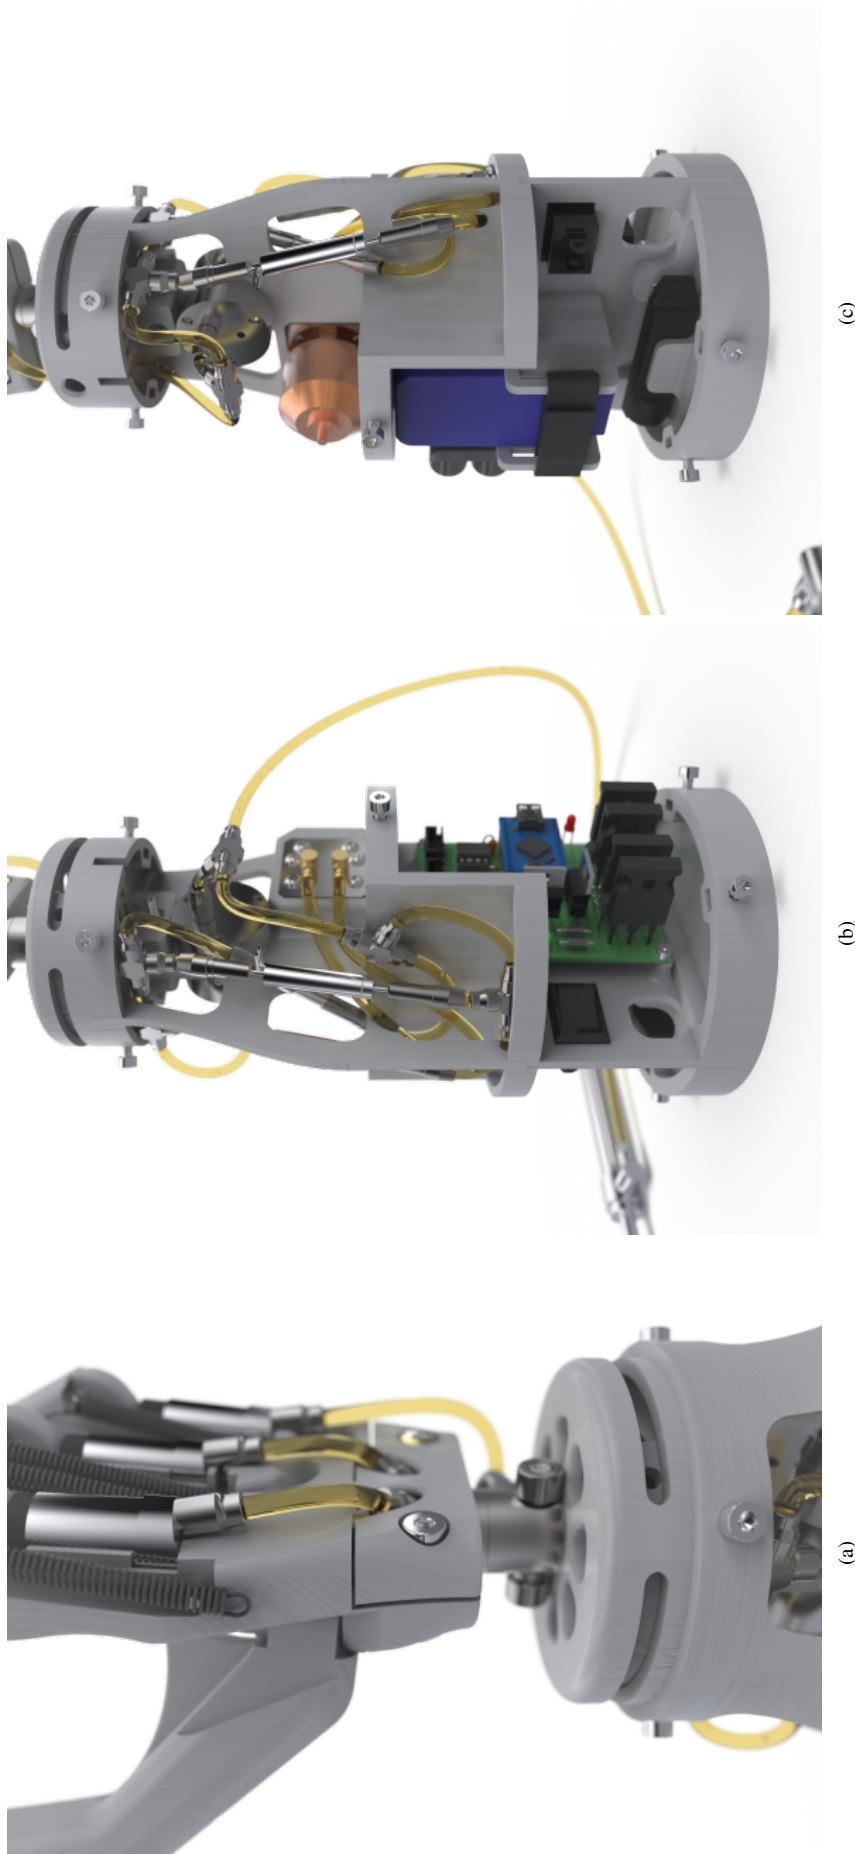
(a) Detailed view of the wrist and hand cylinders (b) Perspective view of the hydraulics and electronics (c) Perspective view of the motor and battery
